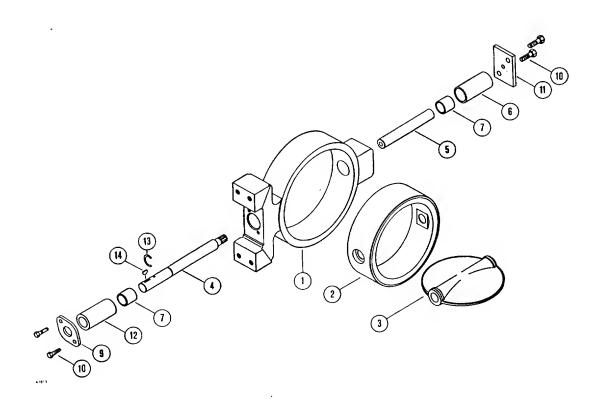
Coated Disc Construction with Keyed Valve Shaft
